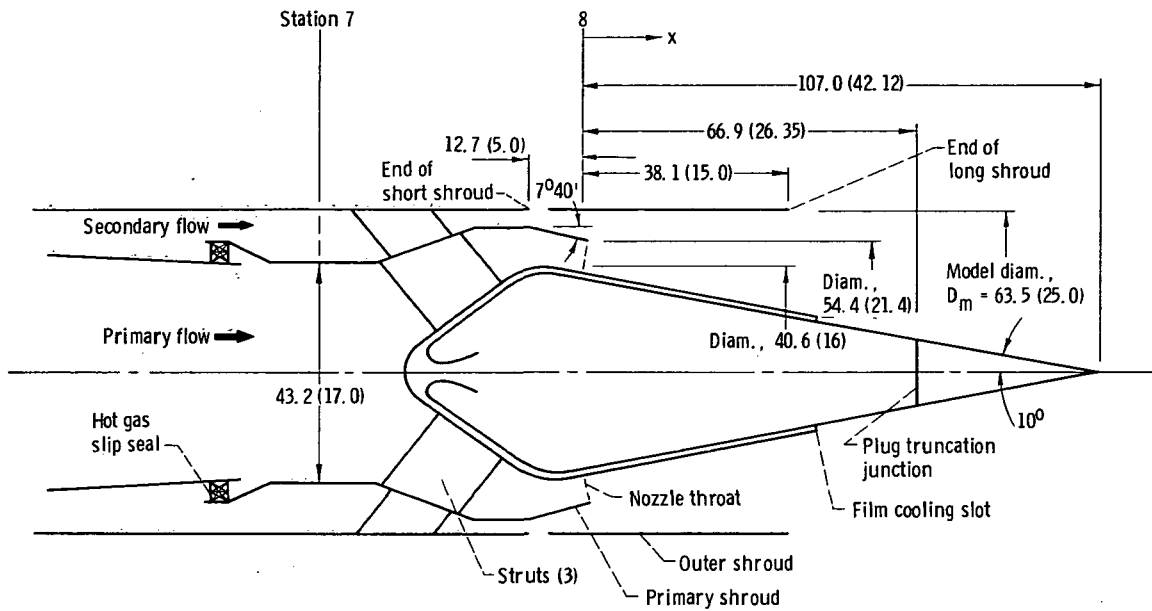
Schematic of plug nozzle design. (All dimensions are in cm (in.) unless indicated otherwise.)
